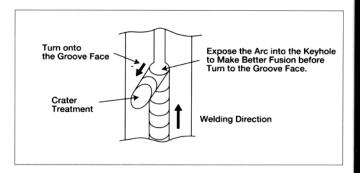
How to terminate the weld crater in order to prevent the crater from cracking
